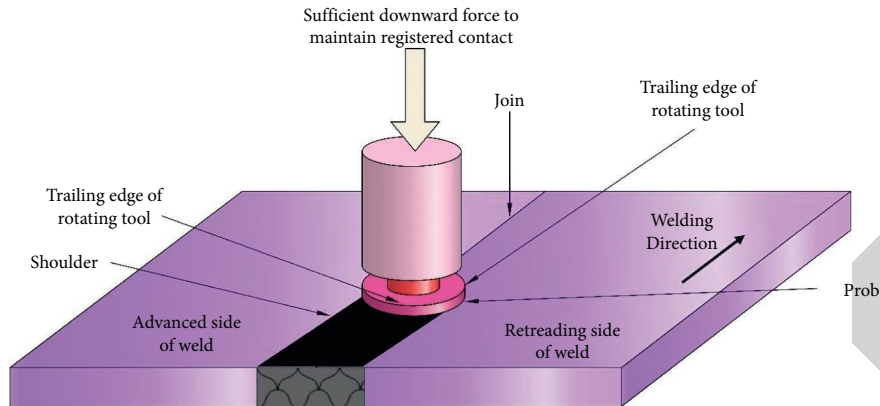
Schematic Diagram of Friction stir welding.
